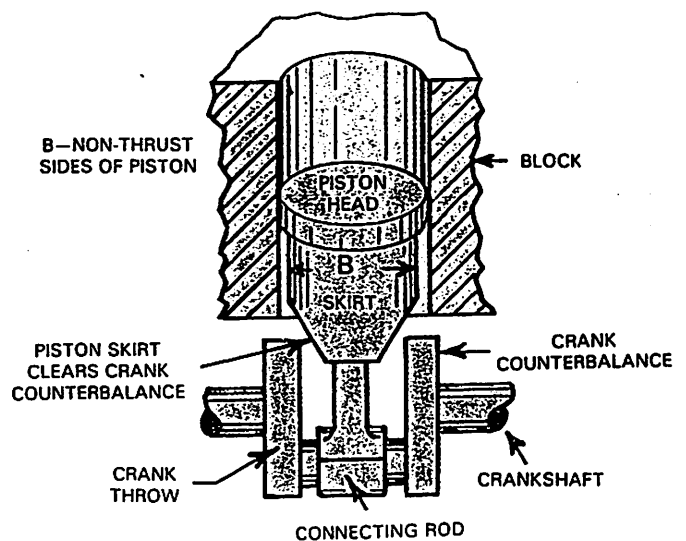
Non-thrust sides of skirt are removed from partial skirt pistons. This allows piston to approach crankshaft more closely without striking.
